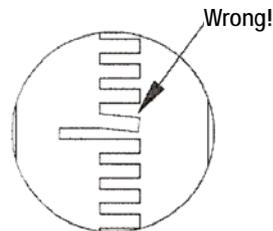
Slotted mounting bracket for position sensor: checking the ridges
